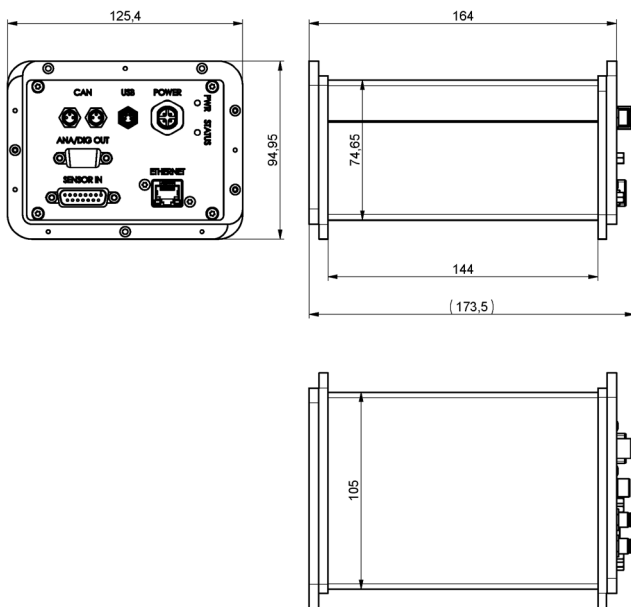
Dimensions of the Kistler MSW sensor electronics
